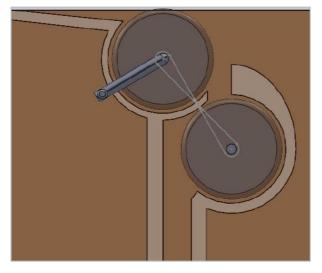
First prototypes developed on the principle of smearing of paste onto the bamboo stick using one cylindrical roller
